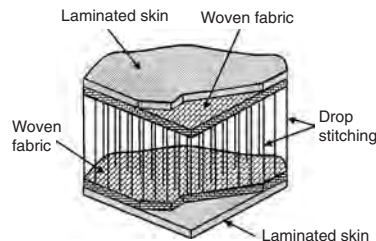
Section view of an example drop-stitch construction for air-inflated fabrics.
